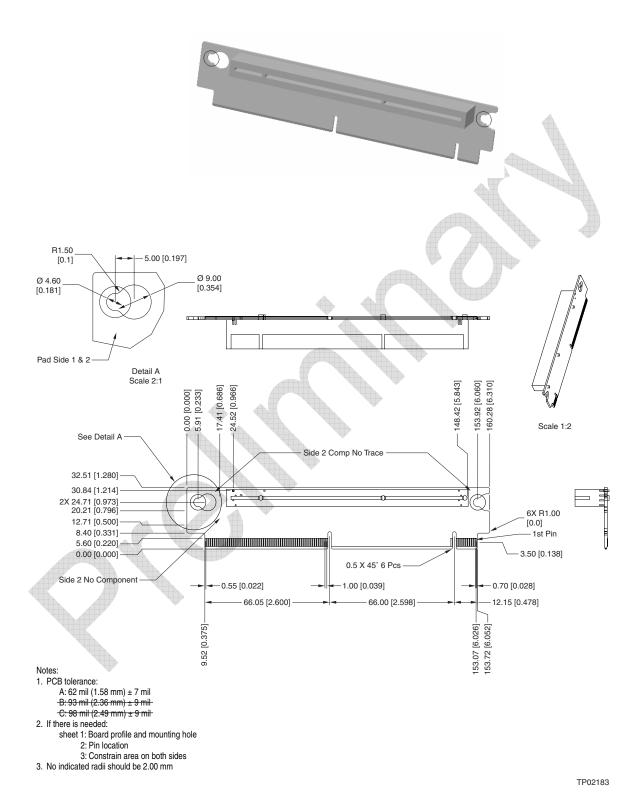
1U Full Height PCI-X* Riser Card Mechanical Drawing
